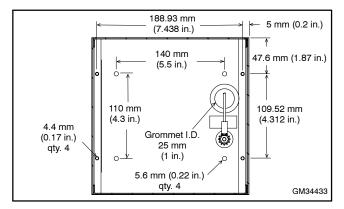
RSA Mounting Hole Dimensions in Supplied Box GM31884
